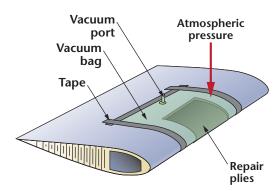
Vacuum bagging can conform to the part as a shot bag cannot. Vacuum bagging adds pressure to all sides under the vacuum.
